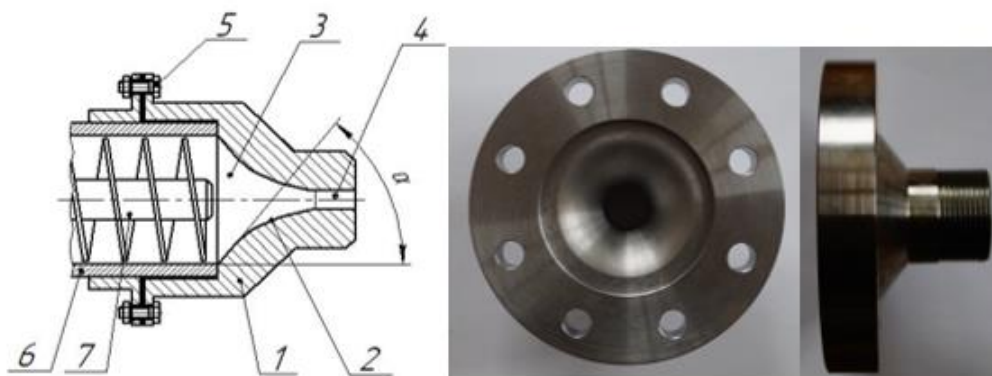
Scheme and general view of the molding head with a combined inner surface: 1 - molding head; 2 - curved section; 3 - working chamber; 4 - outlet; 5 - threaded connection; 6 - auger body; 7 - auger housing
